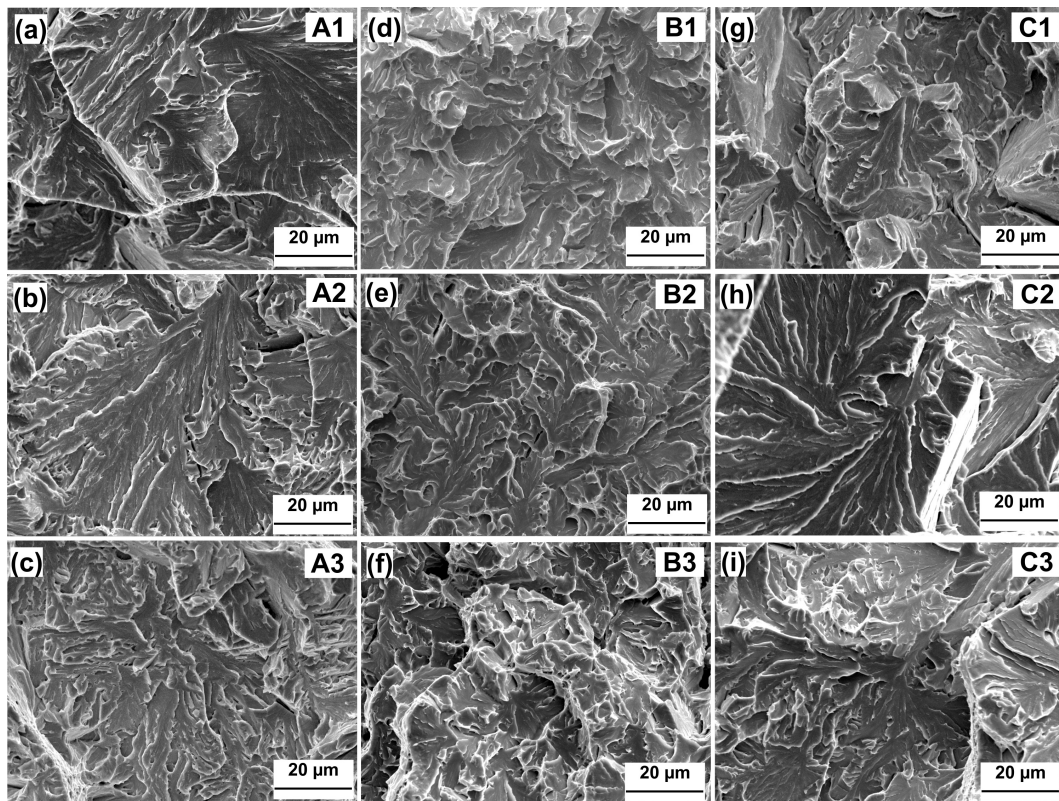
Fractographic examination in weld A1 – A3 (a – c), B1 – B3 (d – f) and C1 – C3 (g – i)
